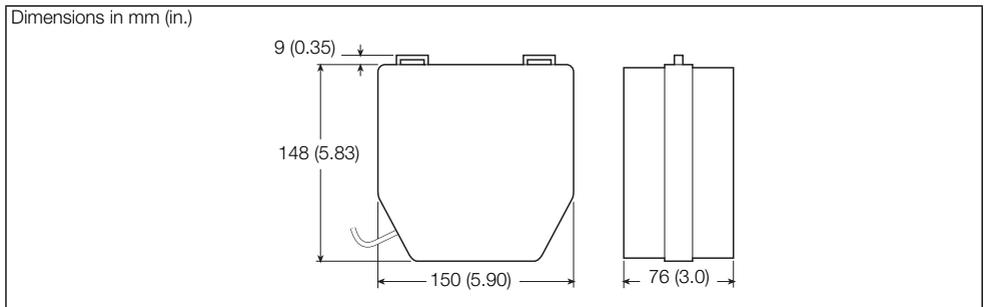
AquaMaster3 Battery Pack Dimensions
